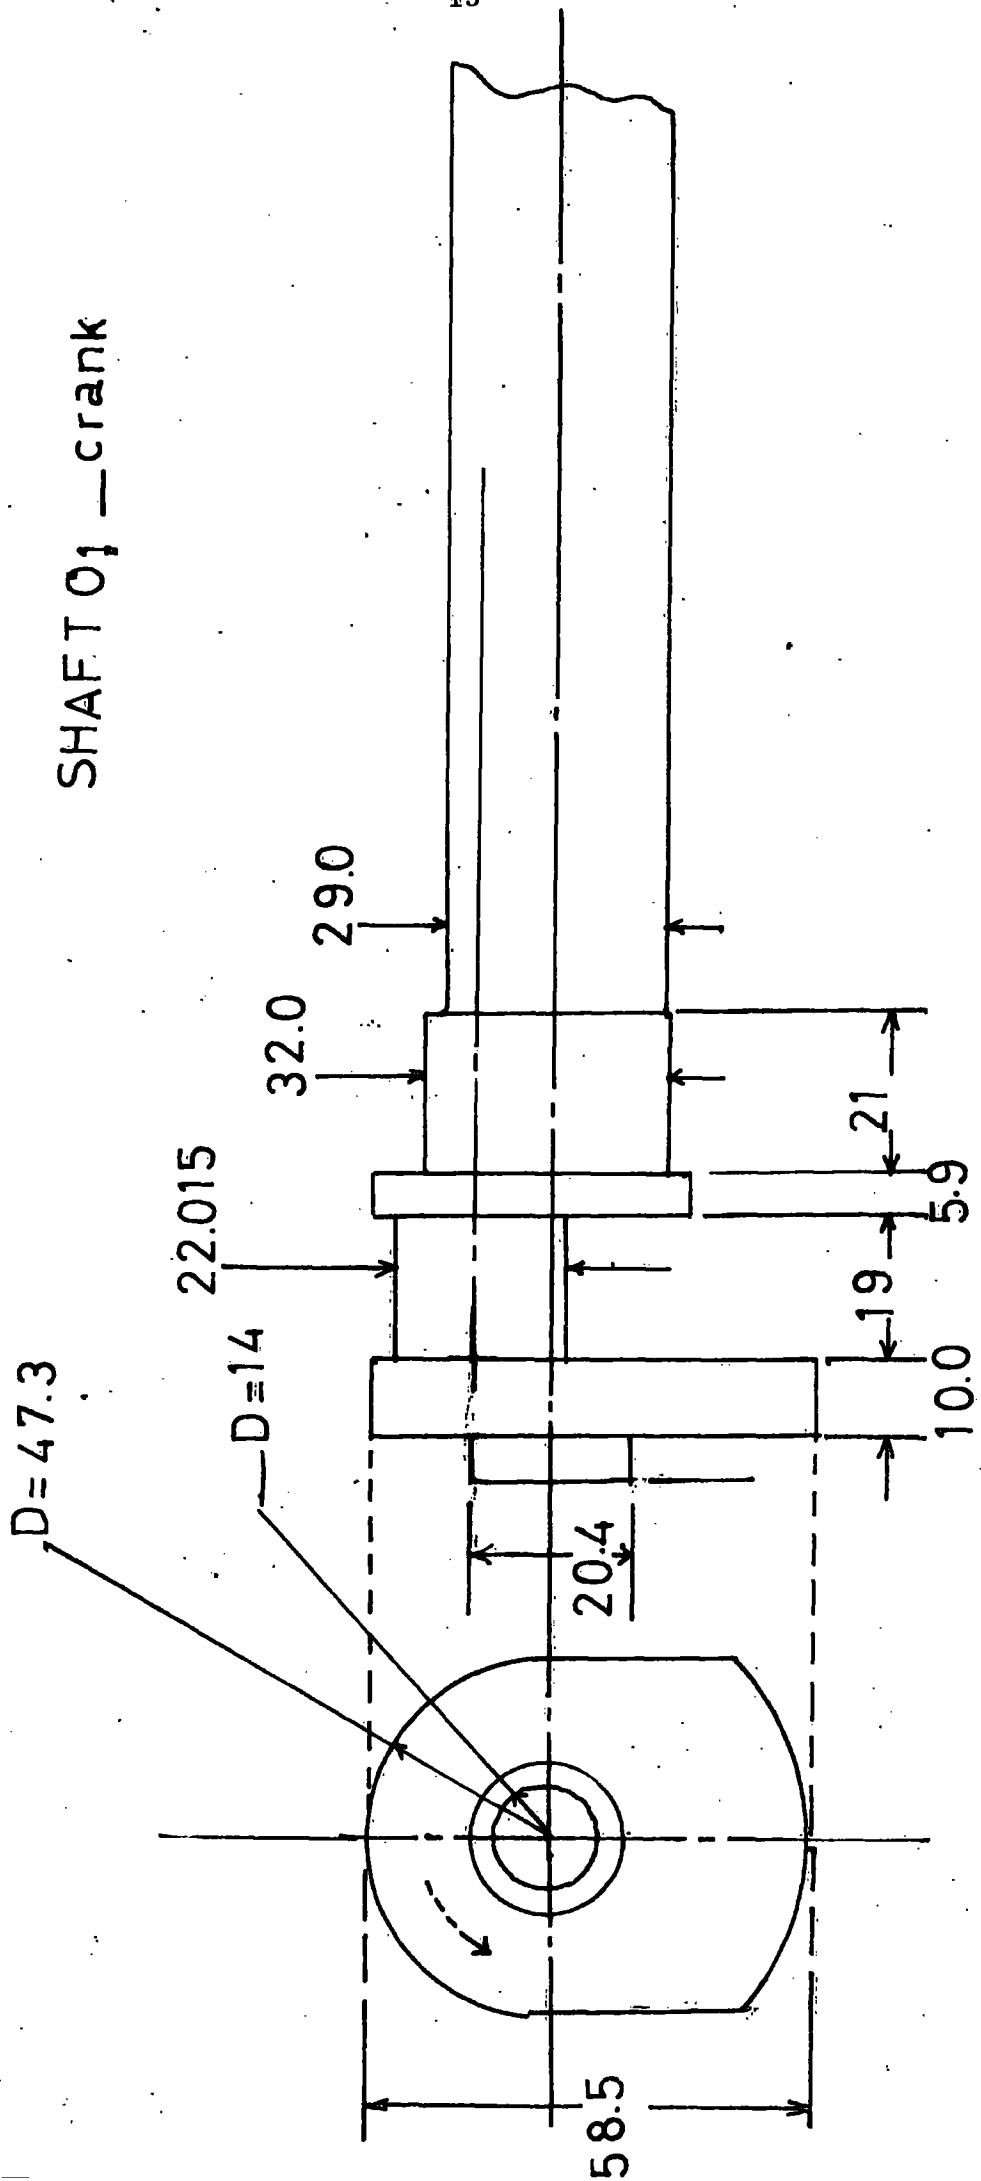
Main drive shaft crank arm end detailed drawing
